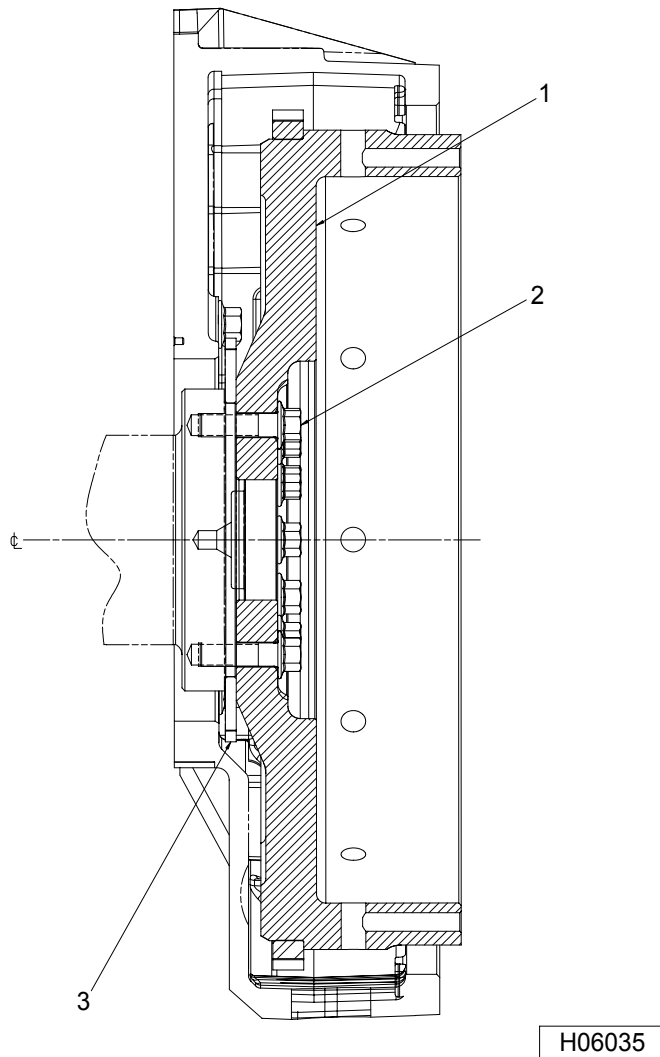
Pot type flywheel – for multiple plate clutch applications, 800 lbf-ft and above
